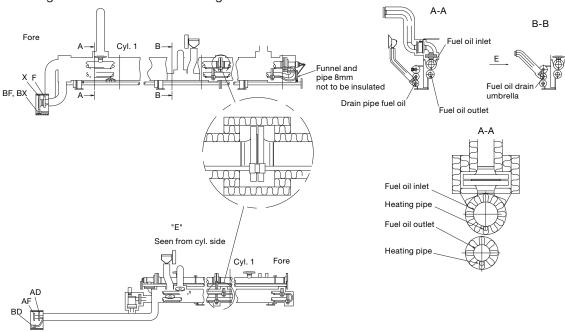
Details of fuel oil pipes insulation, option: 4 35 121. Example from 98-50 MC engine
